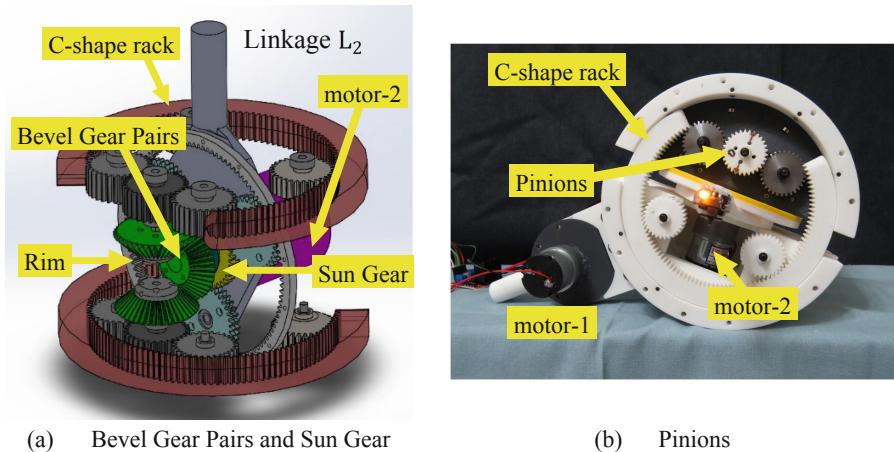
The CAD drawing and the prototype of the 2-DOF mechanism
